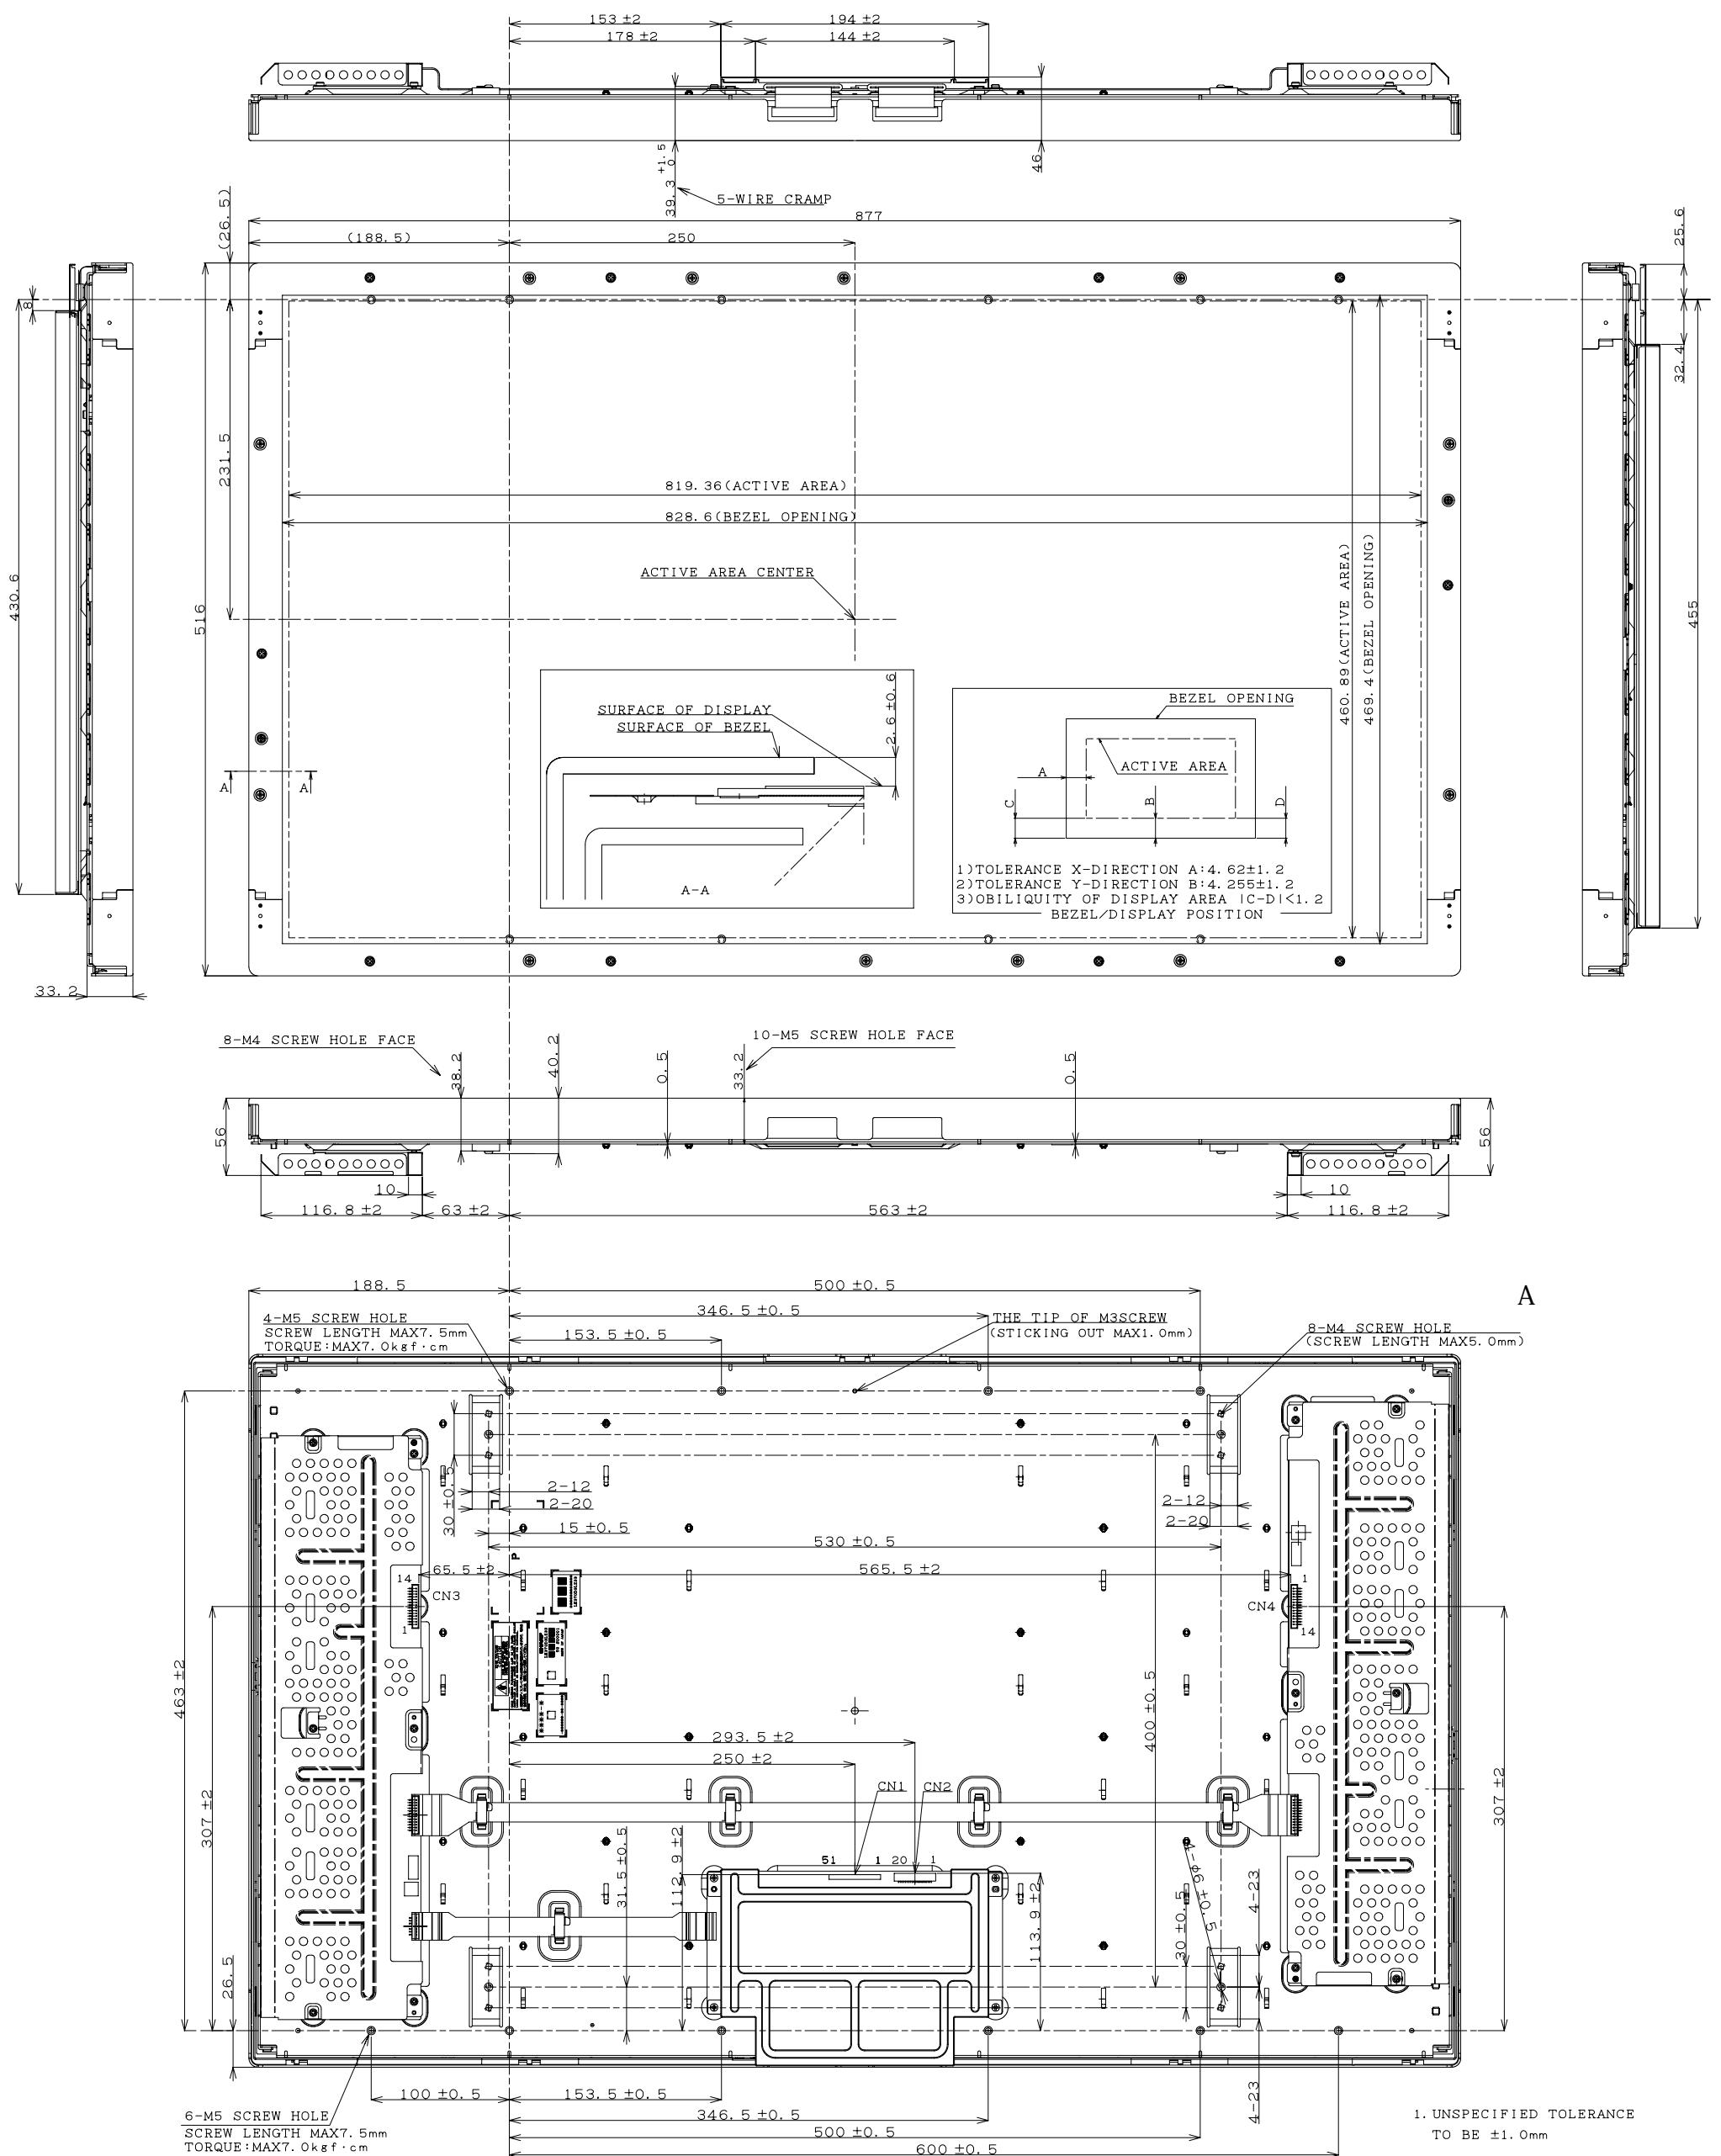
LK370D3LZ33 OUTLINE DIMENSIONS
